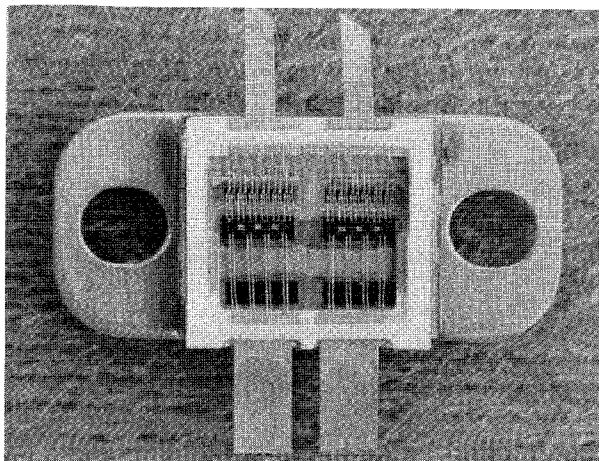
Inside view of packaged transistor showing bonding configuration (Power Hybrids PH 8518).
